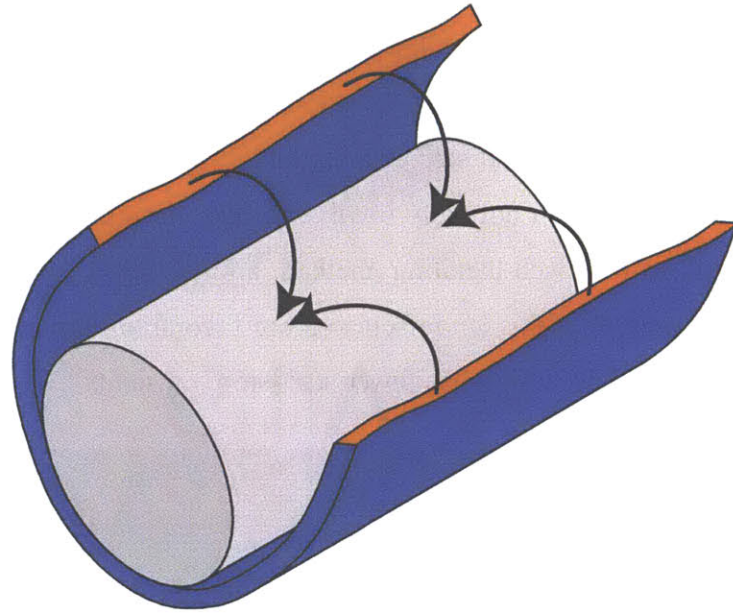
A planar stamp is wrapped around a print roll to enable roll-to-plate microcontact printing.
